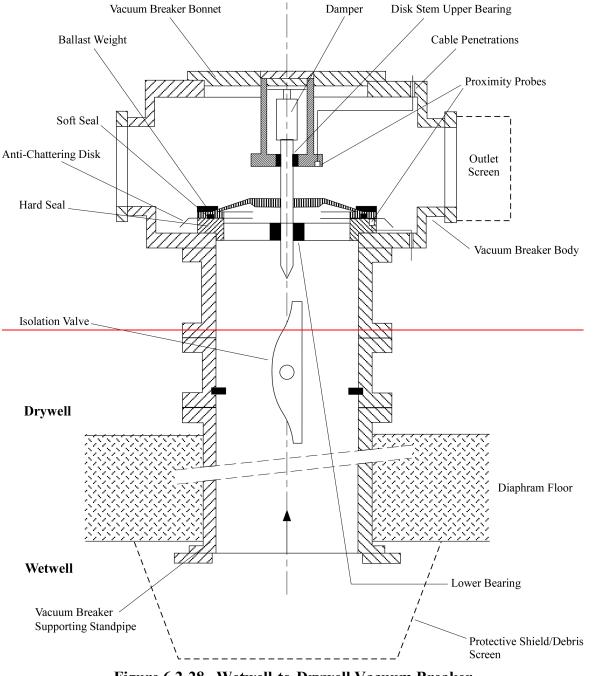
Wetwell-to-Drywell Vacuum Breaker
